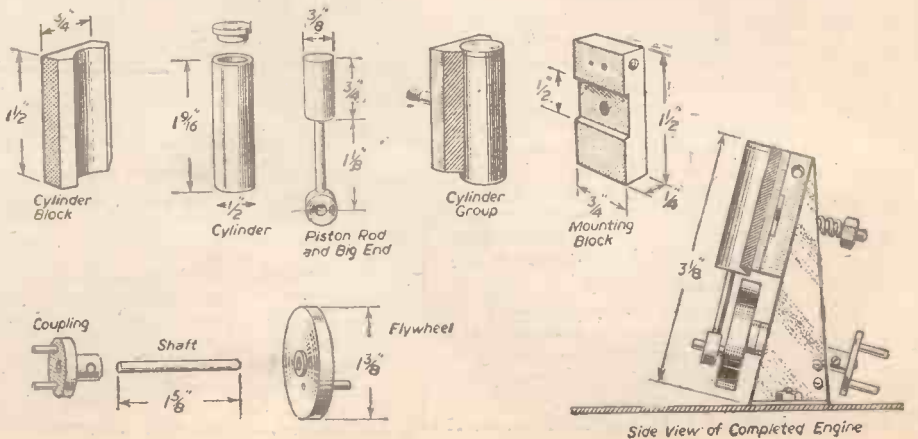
(Above).—Method of locating the steam and exhaust ports. Fig. 12. (Right)—Component parts and side view of the completed engine.
